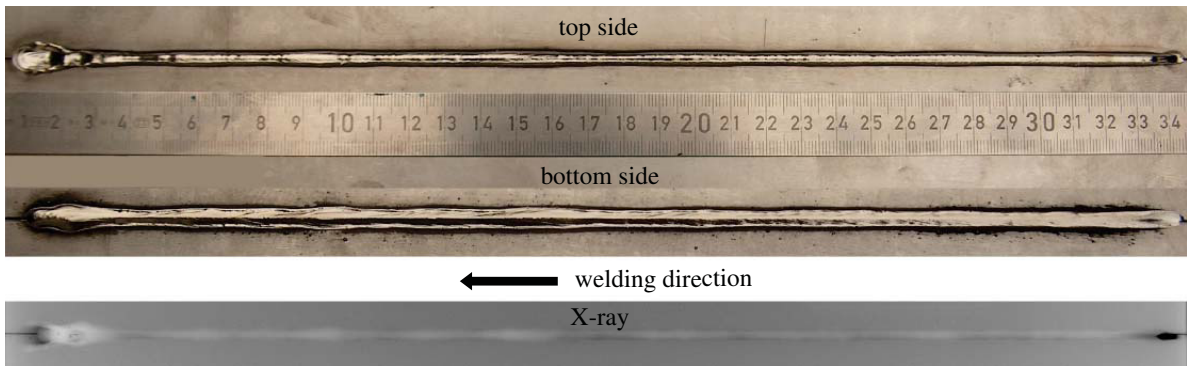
Trailing nozzle weldseam and X-ray. Welding parameters: laser power 19 kW, focus -8 mm, welding speed 1.8 m/min, shielding gas Argon.
